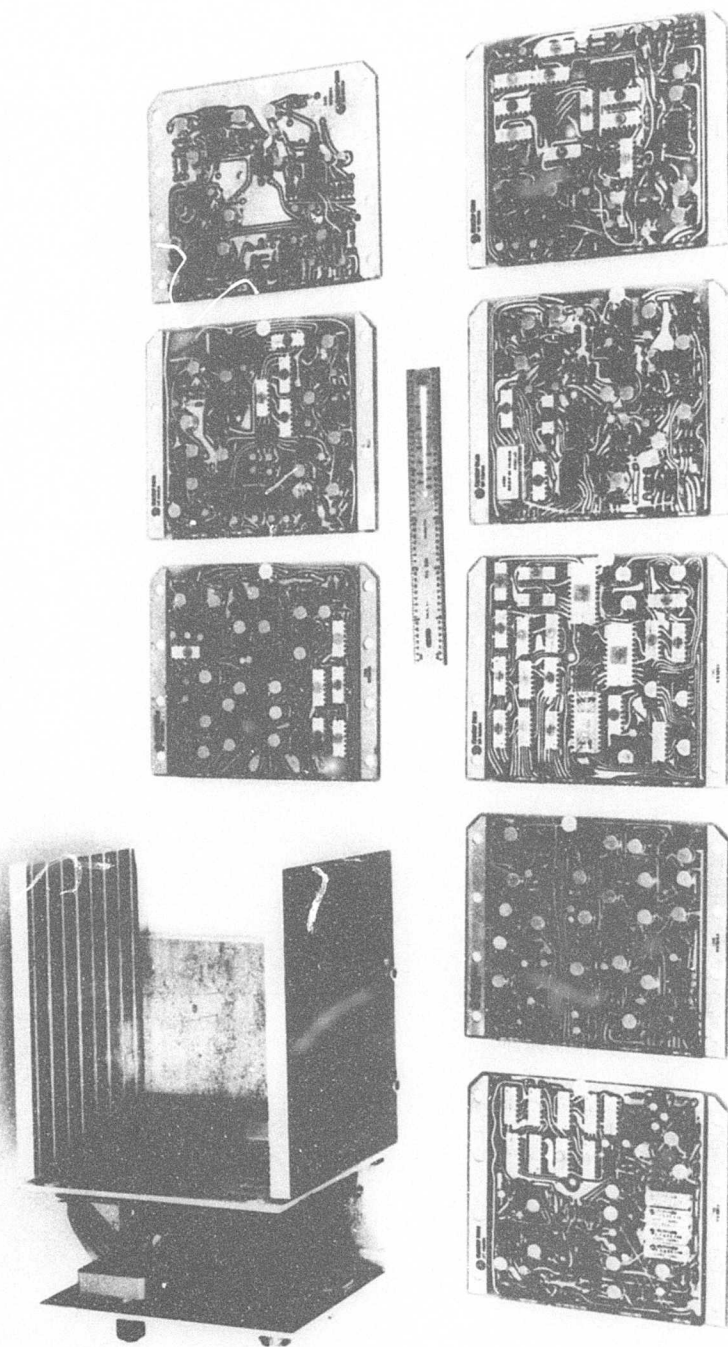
Electronic Computer - Printed Circuit Boards and Test Rig.
